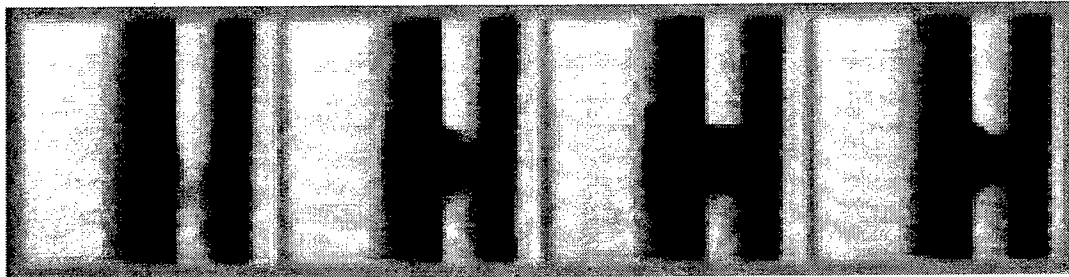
High speed camera recording showing how a spike weld is being made.
